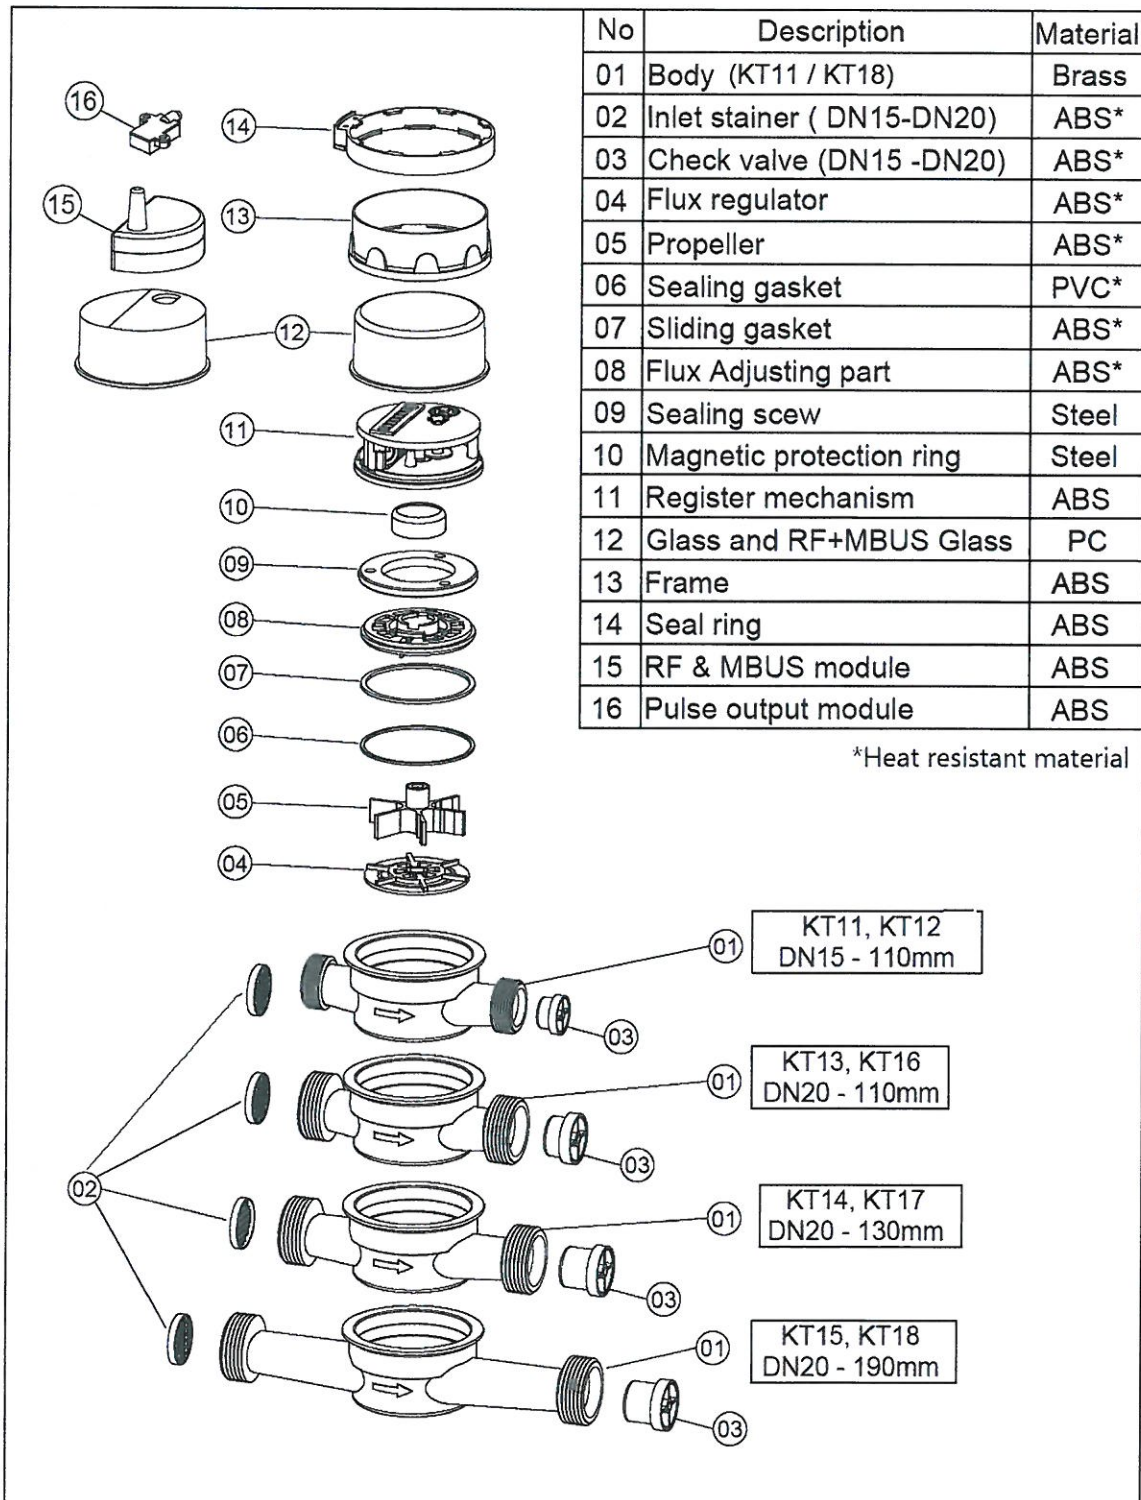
Exploded view of water meters types *KT11 / KT18
